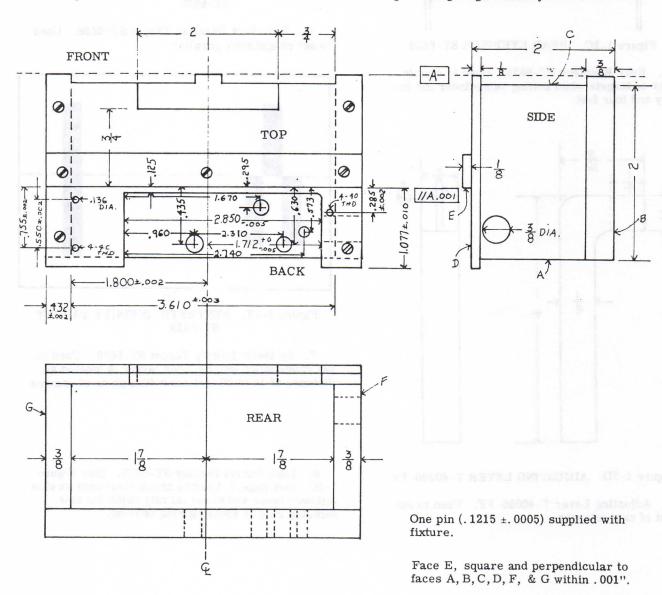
B. RANGEFINDER ASSEMBLY ENGAGING FIXTURE ST-6636
